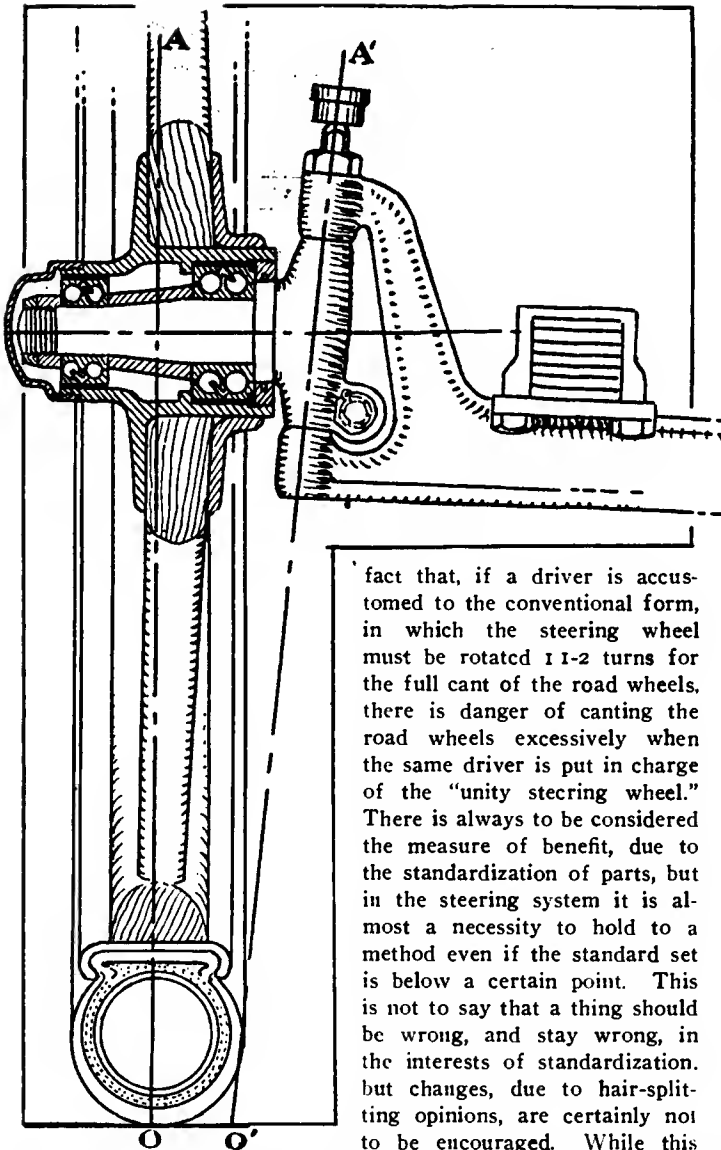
Section of front wheel, showing defect in design which affects steering.
